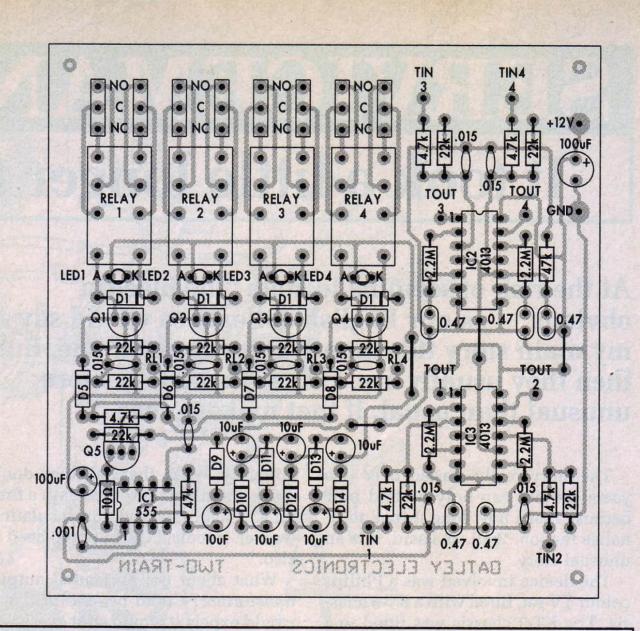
(right): install the parts on the PC board as shown in this layout diagram. The board can be powered from any suitable 12V DC supply (eg, a plugpack).
